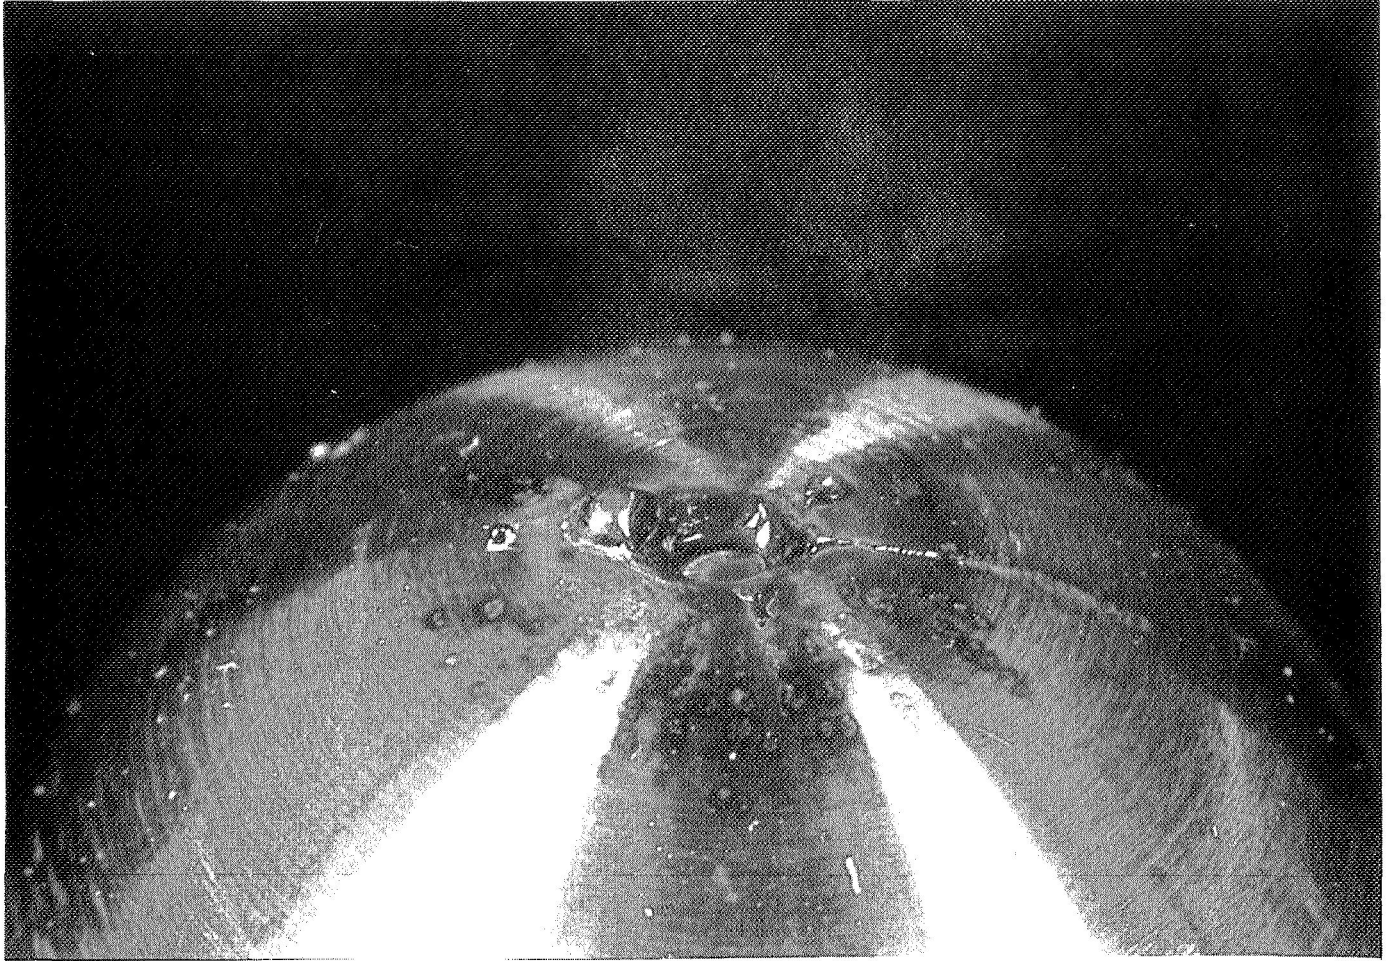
Close Up View of Anode Tip Showing Hole Caused
